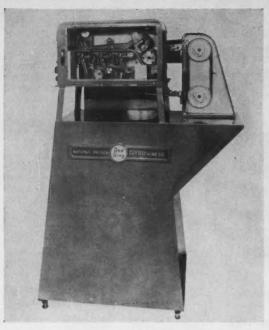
Red Ring gear gaging and sorting machine to be demonstrated with small automotive helical pinions
